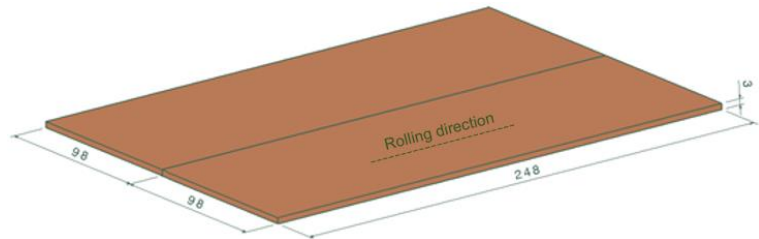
Parts to be welded by FSW and FSW-TIG processes
